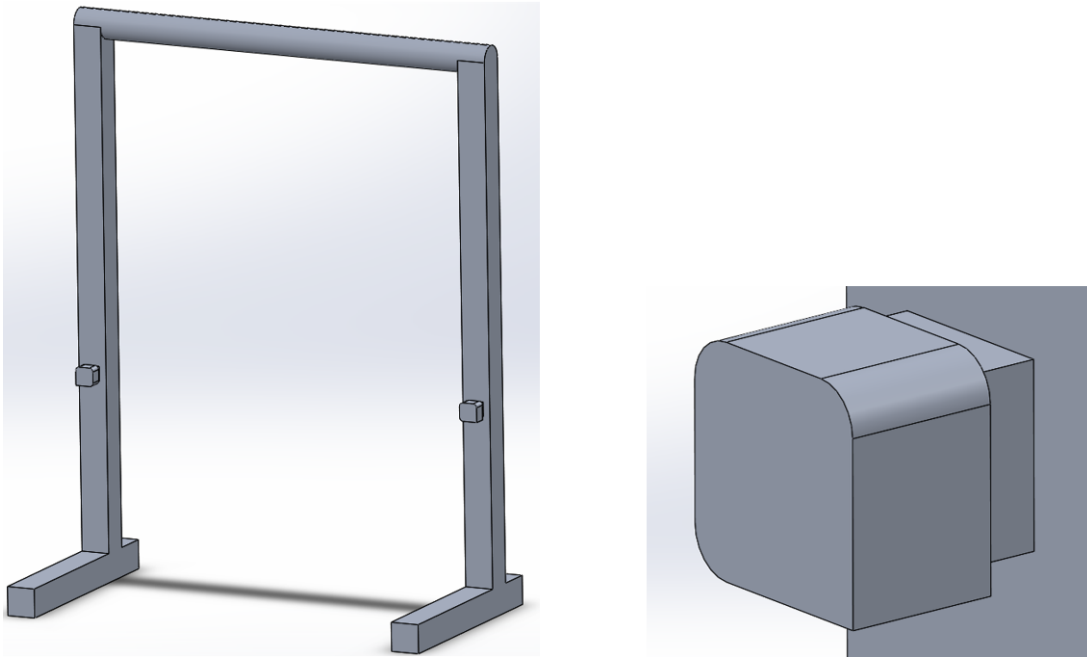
Knobs Placement on Device (Left) and Knob Close-Up (Right)
